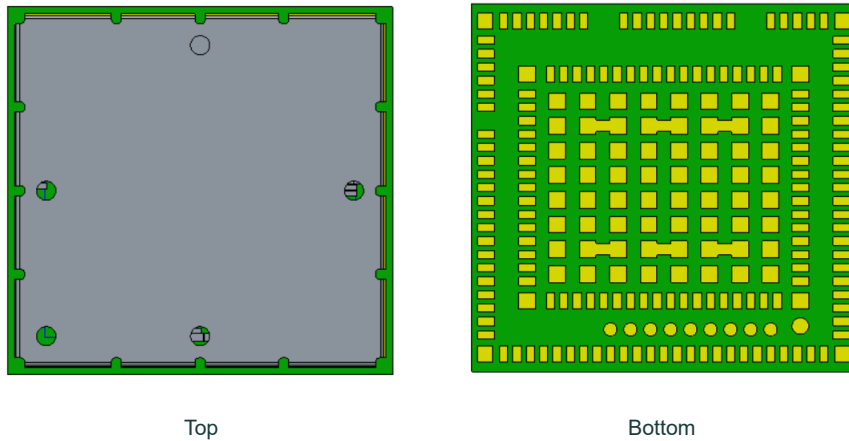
RC71xx Top (Shield Case) and Bottom (PCB) Surfaces
